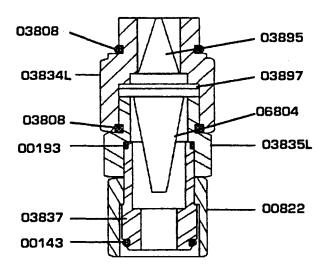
Oxygen Inlet Assembly (P/N 03864L)
